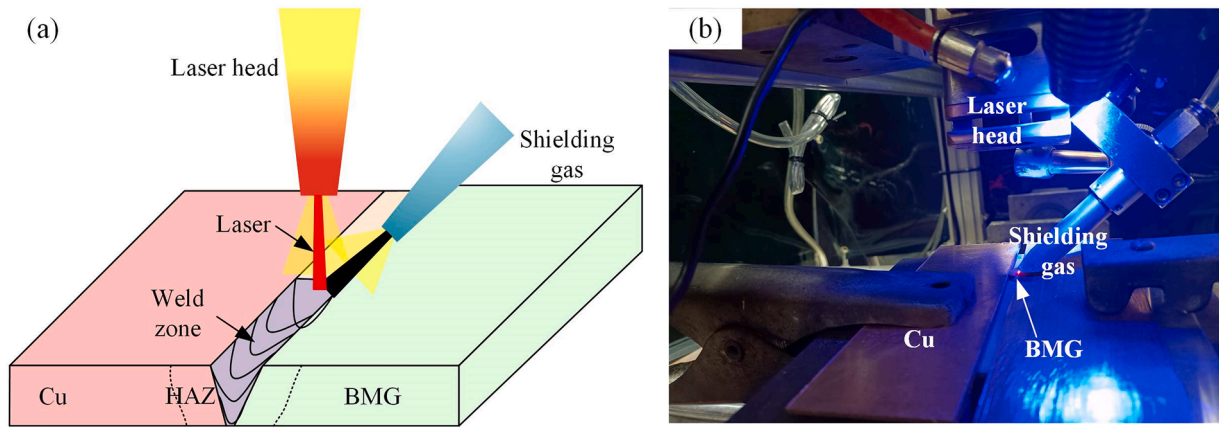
(a) Schematic diagram of pulse laser welding and (b) practical welding process.
